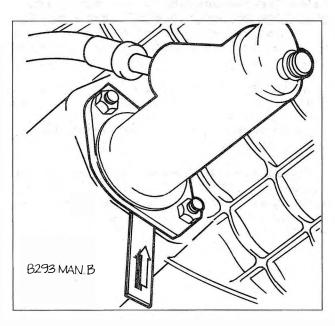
Slave cylinder pushrod travel being checked with metal strip.
